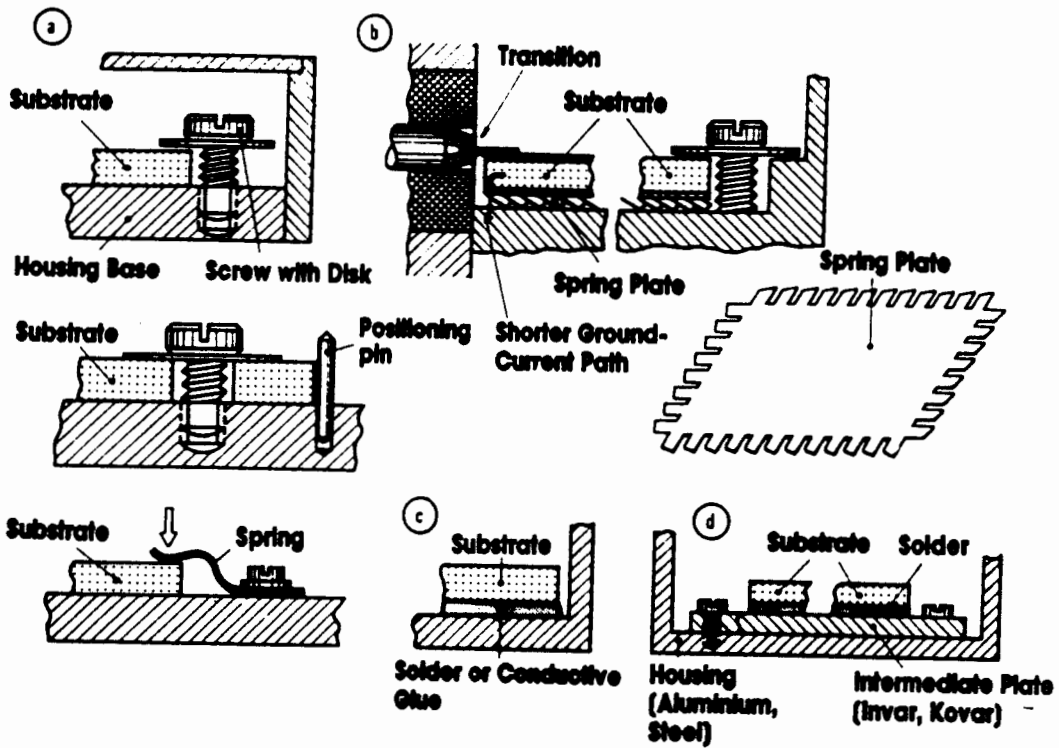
Possible methods of mounting substrate in housing: (a) clamping; (b) clamping with spring plate; (c) soldering or gluing with conductive paste; (d) soldering onto an intermediate invar plate.
